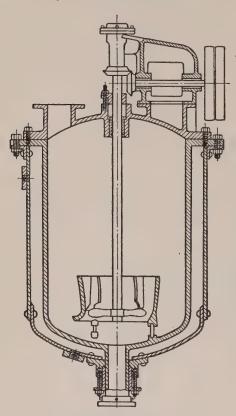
STEAM-JACKETED AUTOCLAVE.
